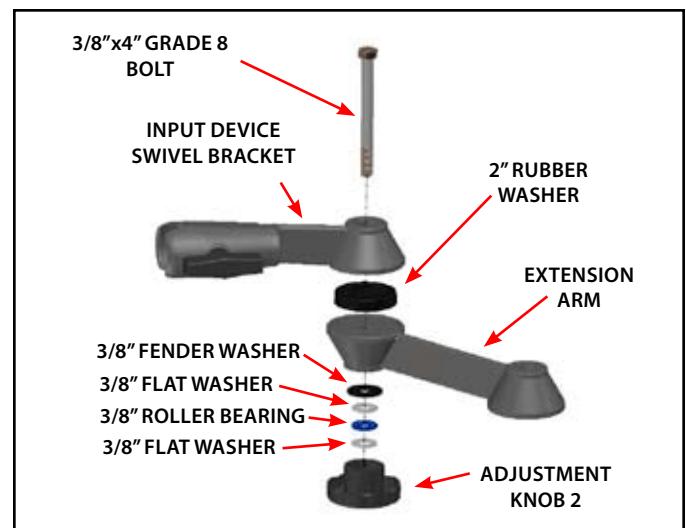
INPUT DEVICE ARTICULATING SWIVEL BRACKET ASSEMBLY
